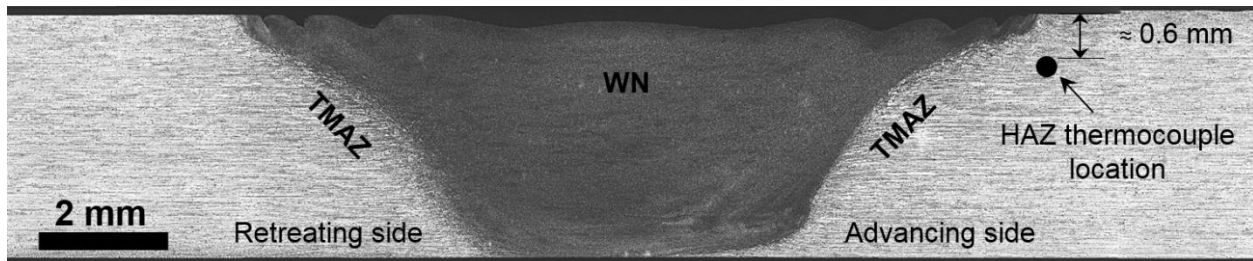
Optical macrograph showing weld cross section of W2 and HAZ thermocouple location.
